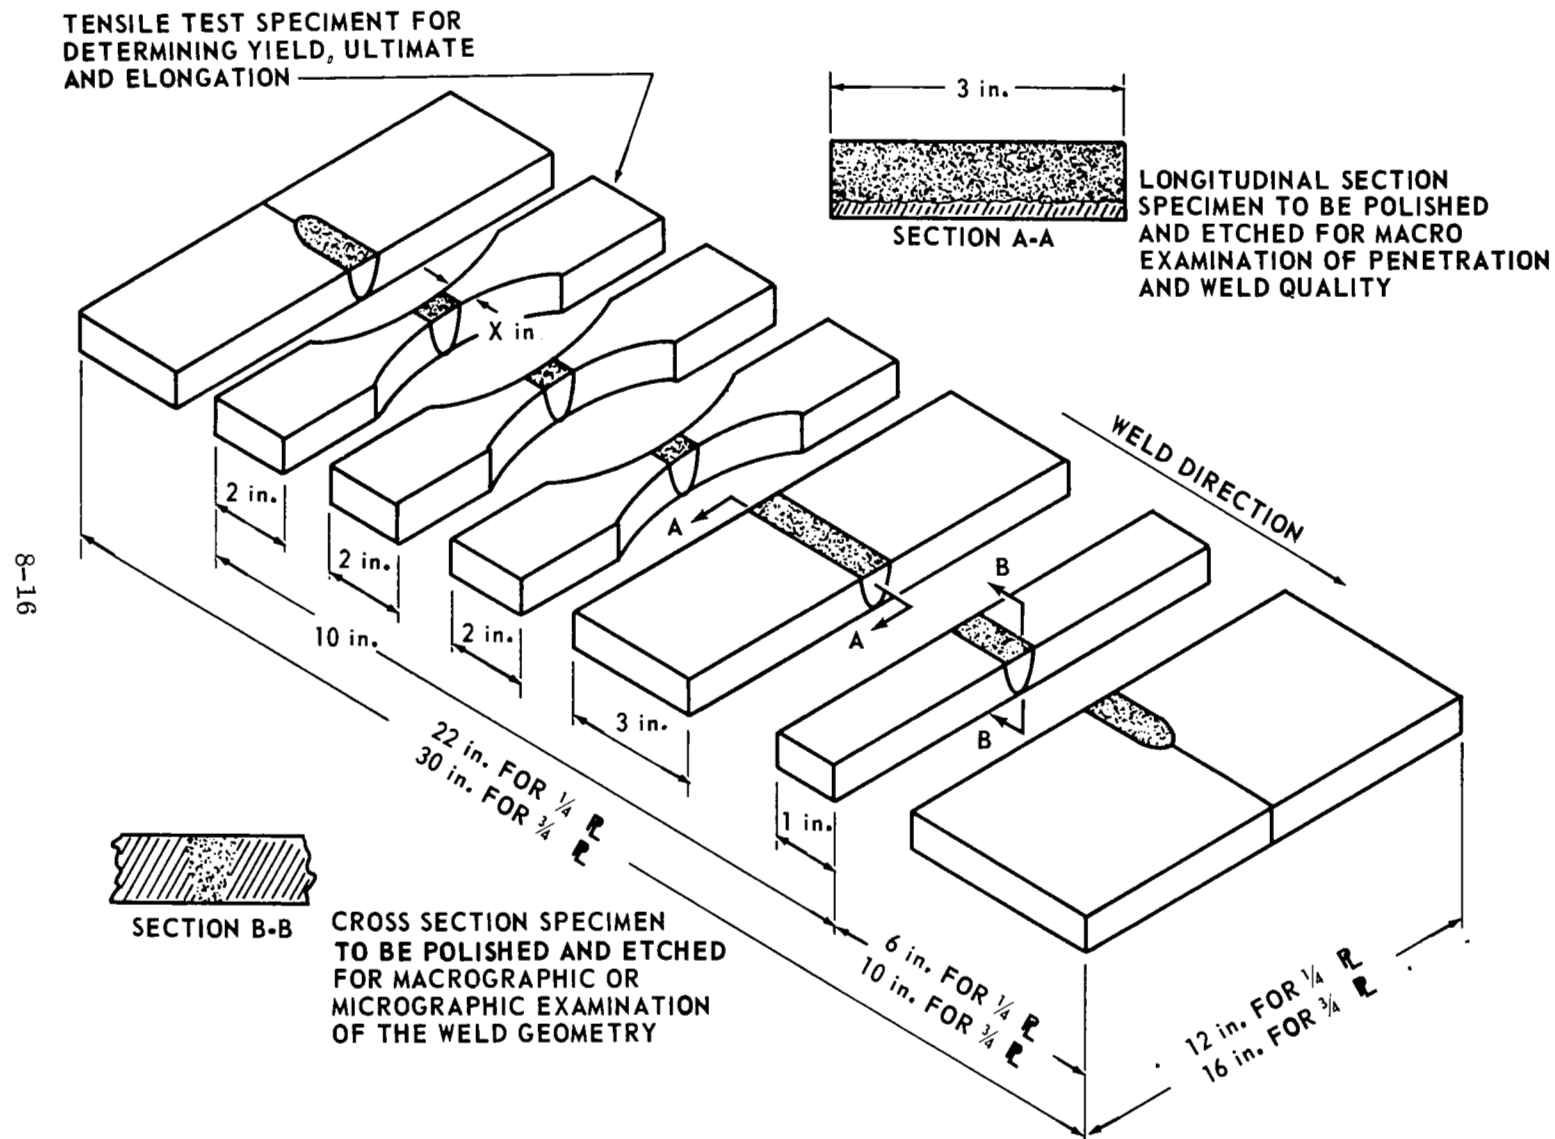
Weld test specimen of  $\frac{1}{4}$  and  $\frac{3}{4}$  in. thick 2219-T87 aluminum alloy.
